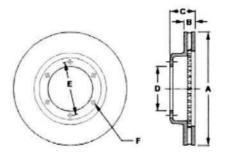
Disc Rotor (Source: Disc Brake Australia)
